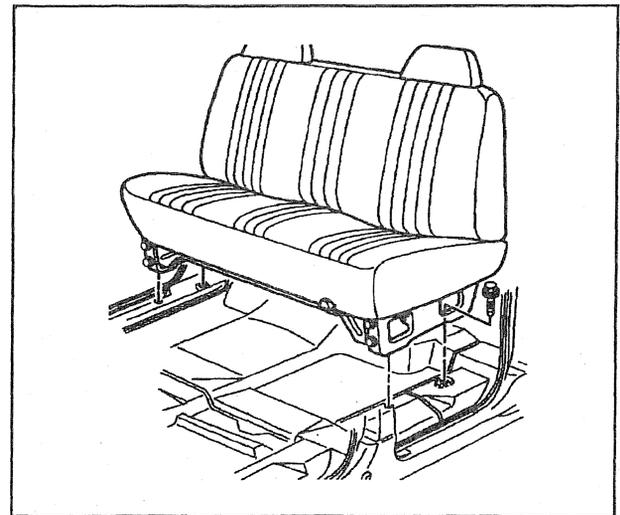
Rear Folding Seat Mounting (Extended Cab)
